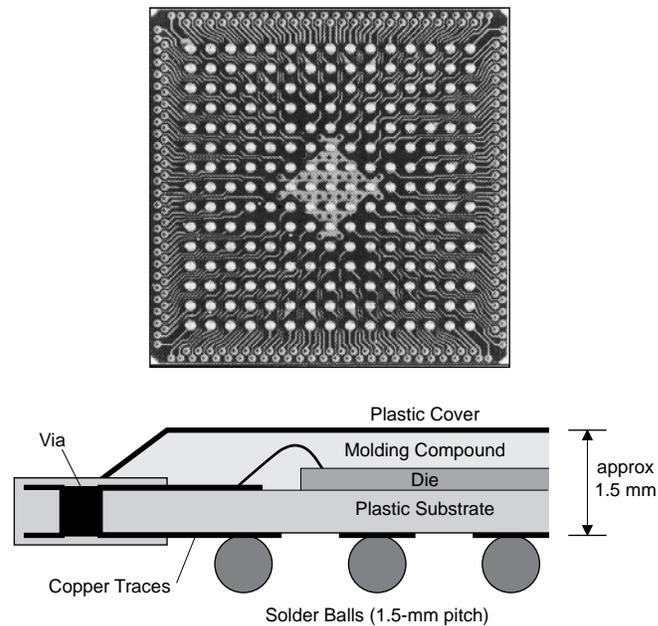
The photograph shows solder balls and traces on the bottom of a ball-grid array (BGA). The diagram shows how signals are routed from the die to the solder balls. (Source: Motorola)
